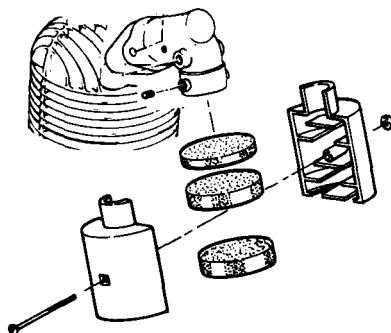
Air muffler element inspection (See Figure 2-9 )
